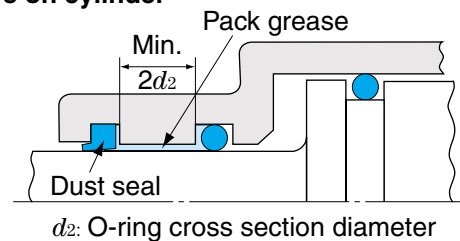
Typical installation of O-ring for dynamic sealing
